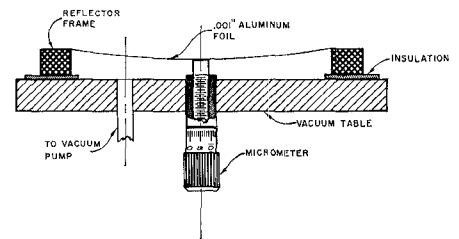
Cross-sectional view of reflector fabrication apparatus.
